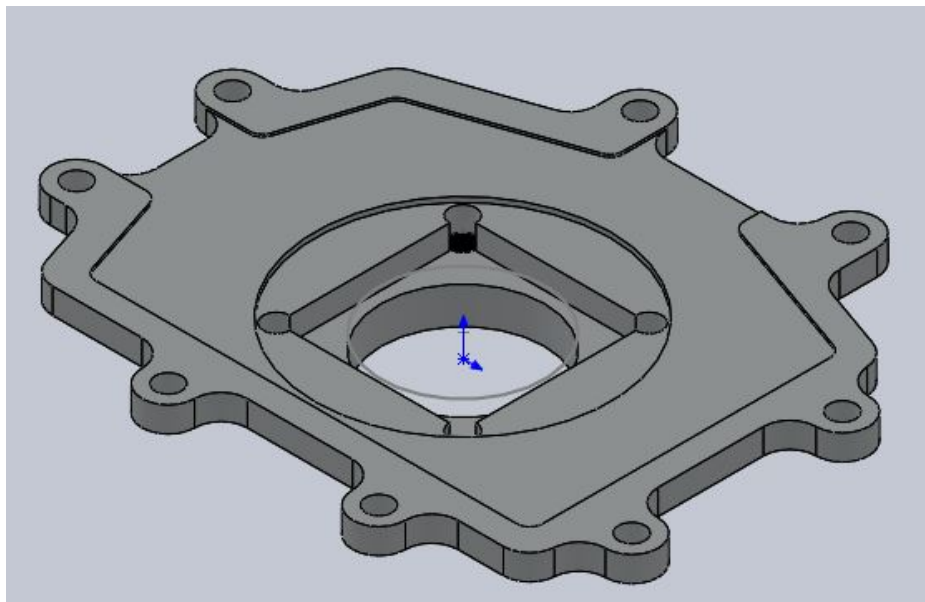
Needle holding plate final design. A sandwich of perforated aluminum square sheets were inserted into center cut out to hold the needles.
